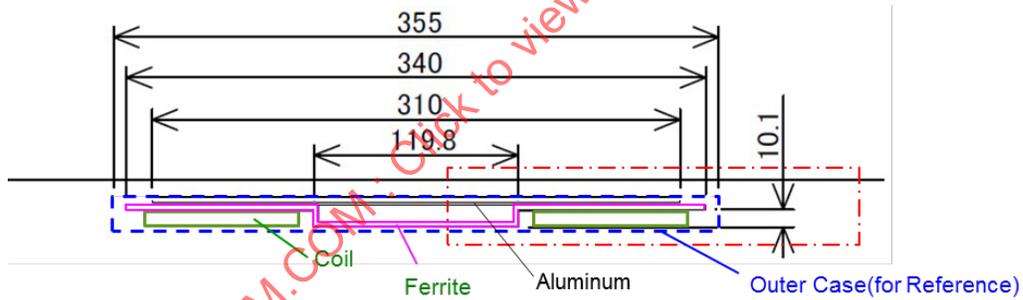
Mechanical dimensions of the Test Station VA WPT1/Z2
